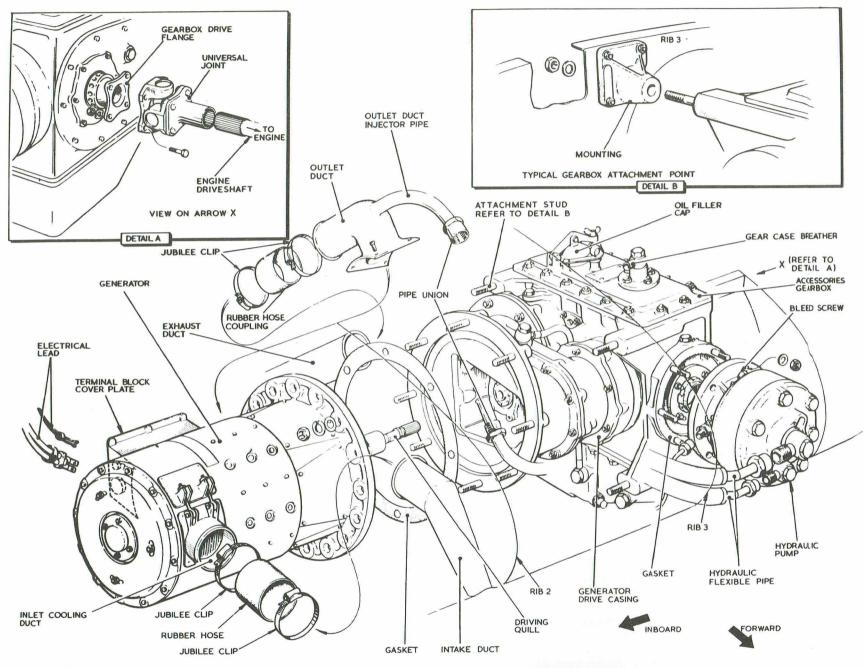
ACCESSORIES GEARBOX REMOVAL AND ASSEMBLY
